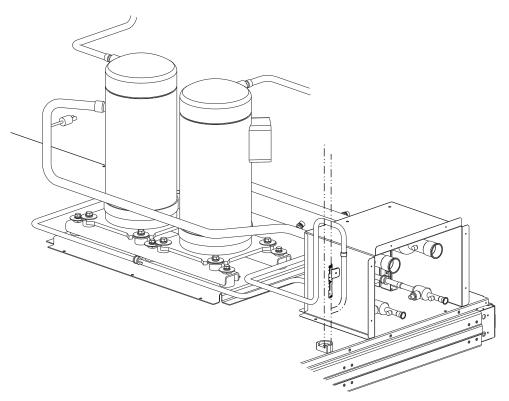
569L*16(T,U) Compressor Assembly (Rear View)
